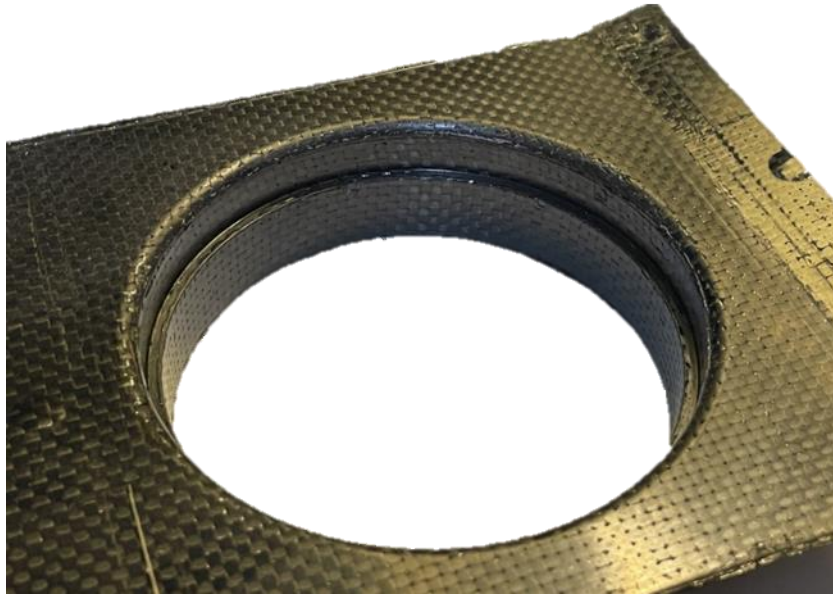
Secondary Drill Fixtures for Front Upright
